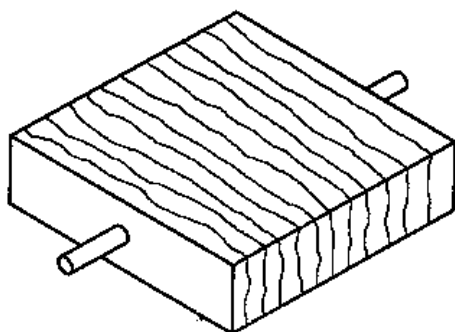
Test arrangement for determining breaking load at dowel hole with the load applied parallel to the planes of anisotropy.
